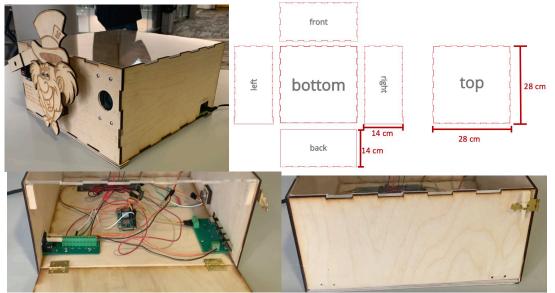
The final box, layout for laser cutting, back opened, and back closed.
